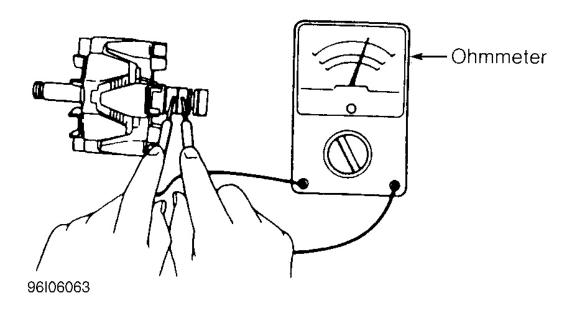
Checking Rotor Resistance Courtesy of MAZDA MOTORS CORP.
